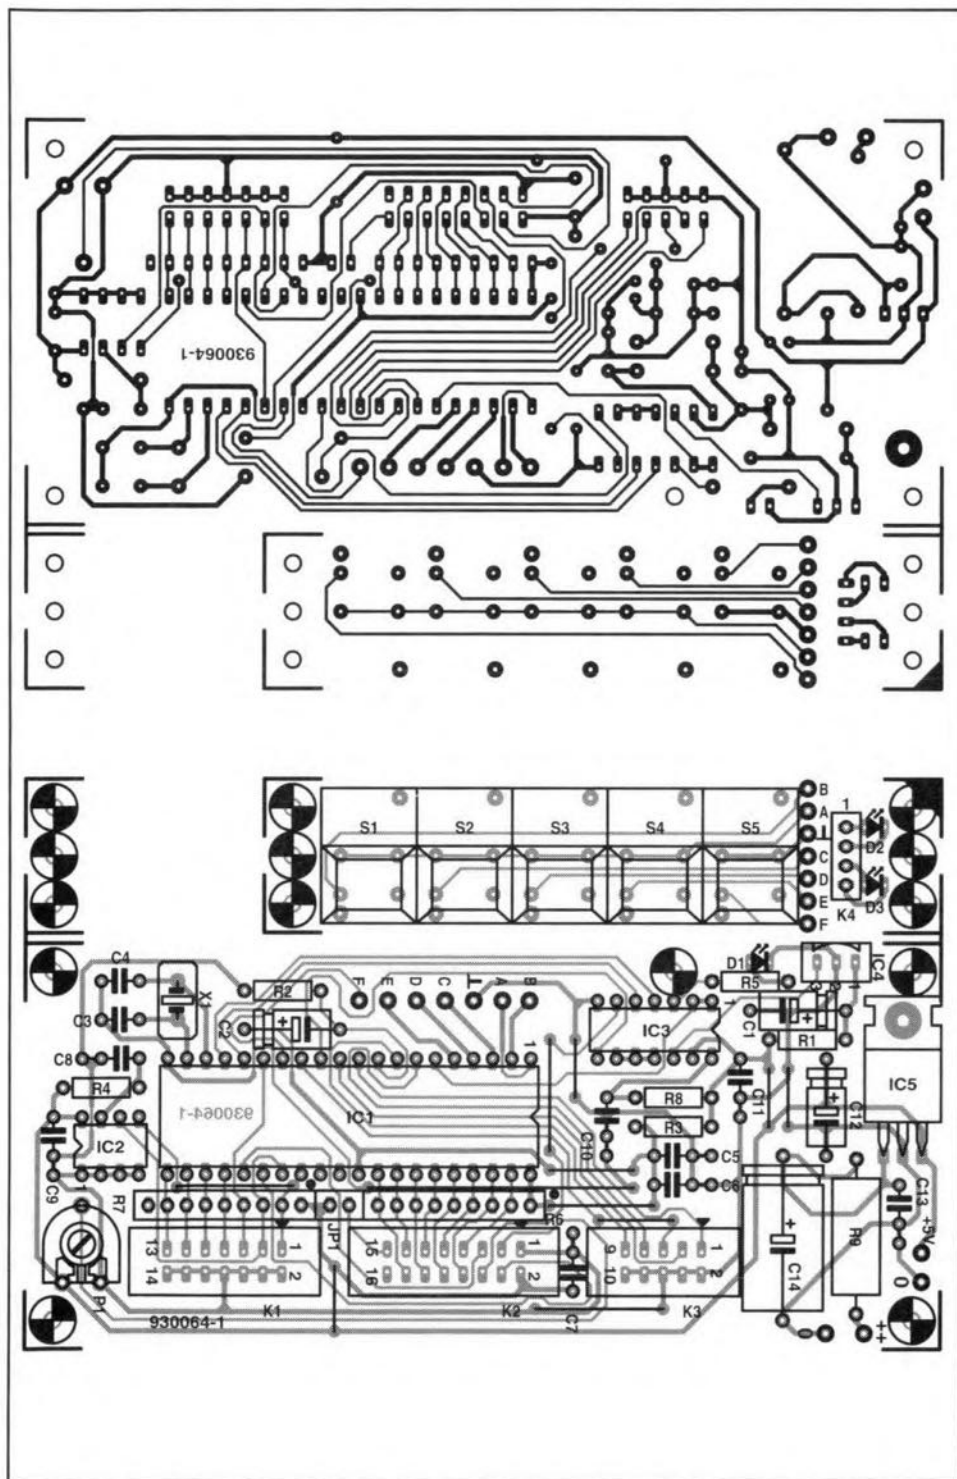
The first PCB combination contains the processor board and the keyboard. These two boards are easily separated using the seam between them.
